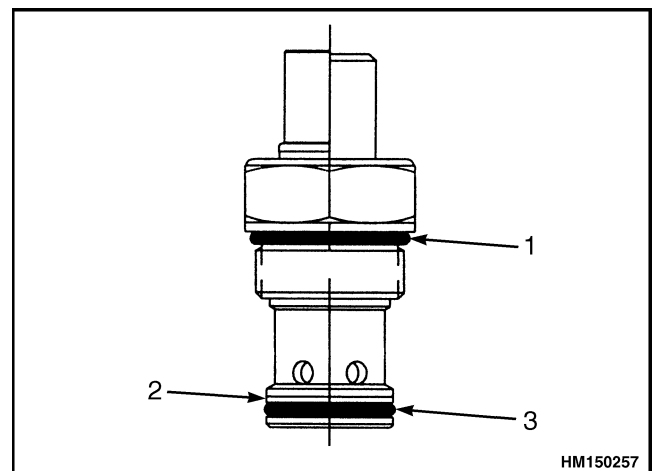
Relief Valve, Fixed Cap / Tamper Resistant Version
